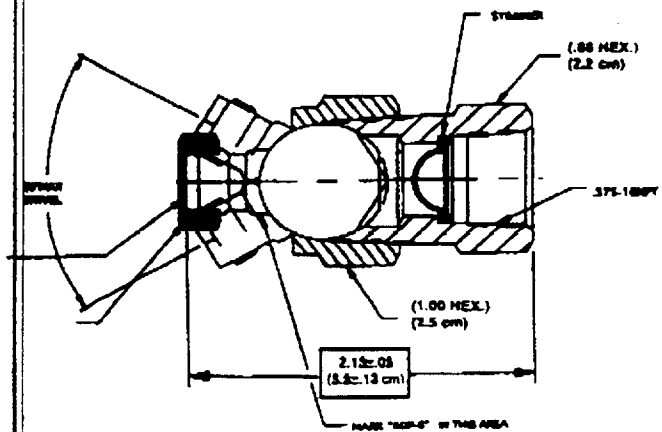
Section View of a ADP-S Swivel Nozzle
